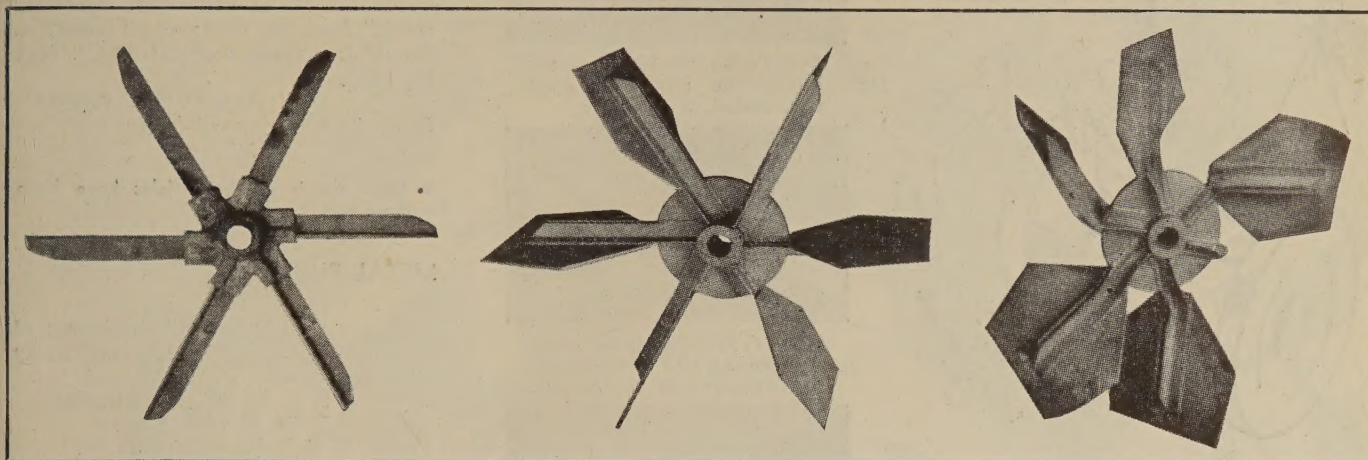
Original construction. Riveted steel blades cast in iron hub. Cost approximately 25¢ per pound including riveted blades.
